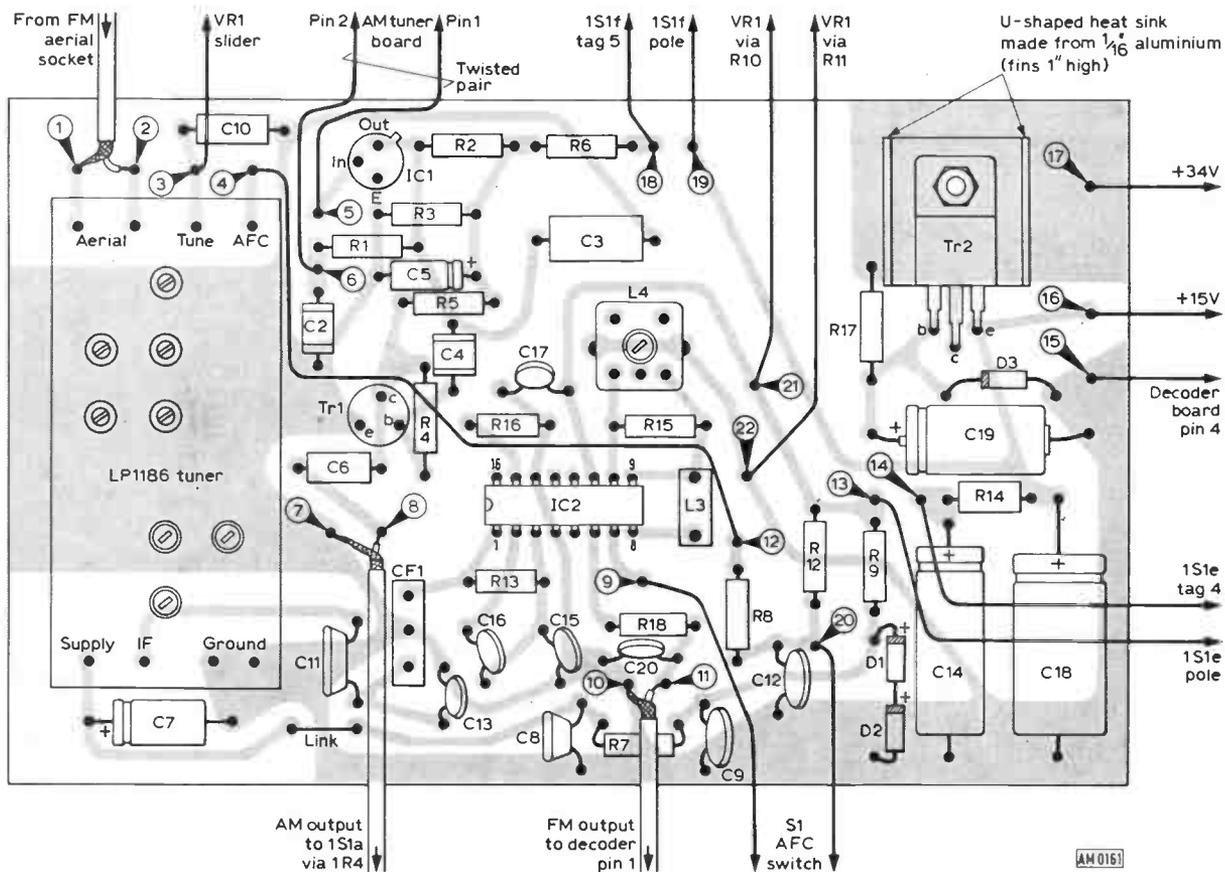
Component location and printed circuit layout for the main Tuner and IF board. Both drawings are actual size.
